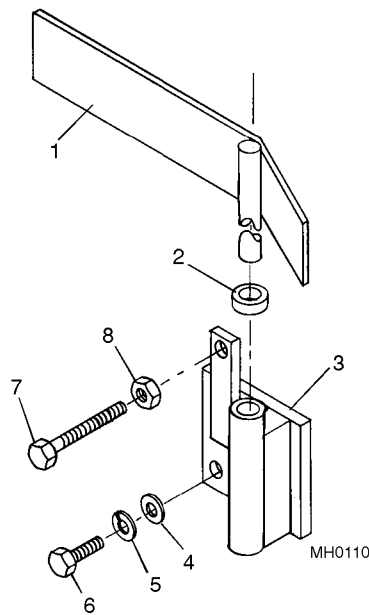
OPTIONAL CROWDER ASSEMBLY.
